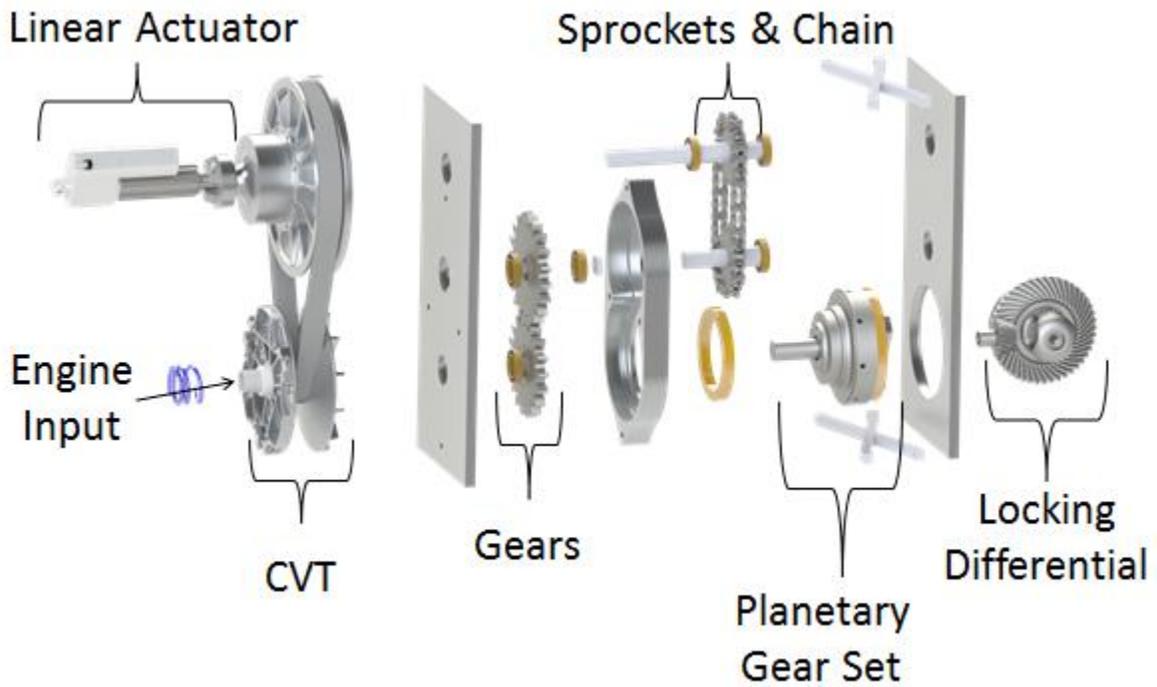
The IVT powertrain system exploded view of assembly by Team Trans-Formers
